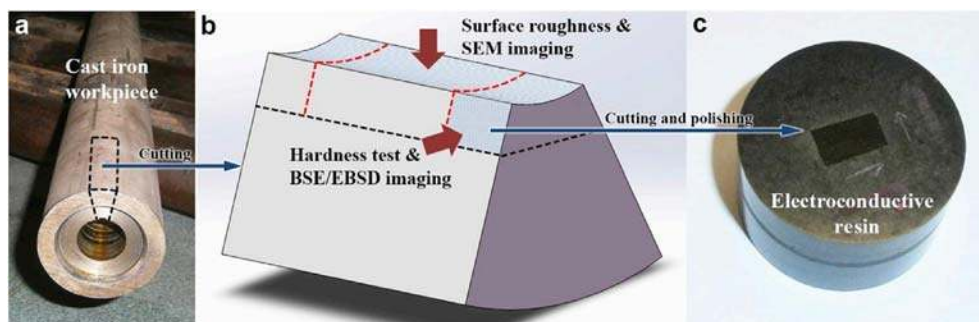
(a) Photo of a BTA drilling machined workpiece from which individual pieces are dissected as marked by the dashed line. (b) Schematic illustration of a dissected workpiece on which different tests are performed as pointed. Roughness measurement and SEM secondary electron imaging tests are carried on the upper surface while hardness test and backscattered electron (BSE) as well as electron backscattered diffraction (EBSD) imaging are conducted on the side cross section. (c) Photo showing a sample prepared for the hardness, BSE and EBSD tests. The sample is embedded in electroconductive resin followed by polishing. The side cross section is facing up as indicated.
